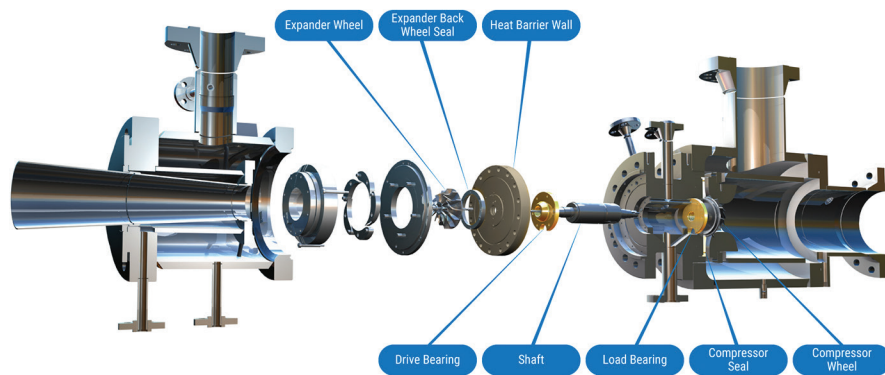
Mechanical center section detail. Image courtesy of L.A. Turbine.
